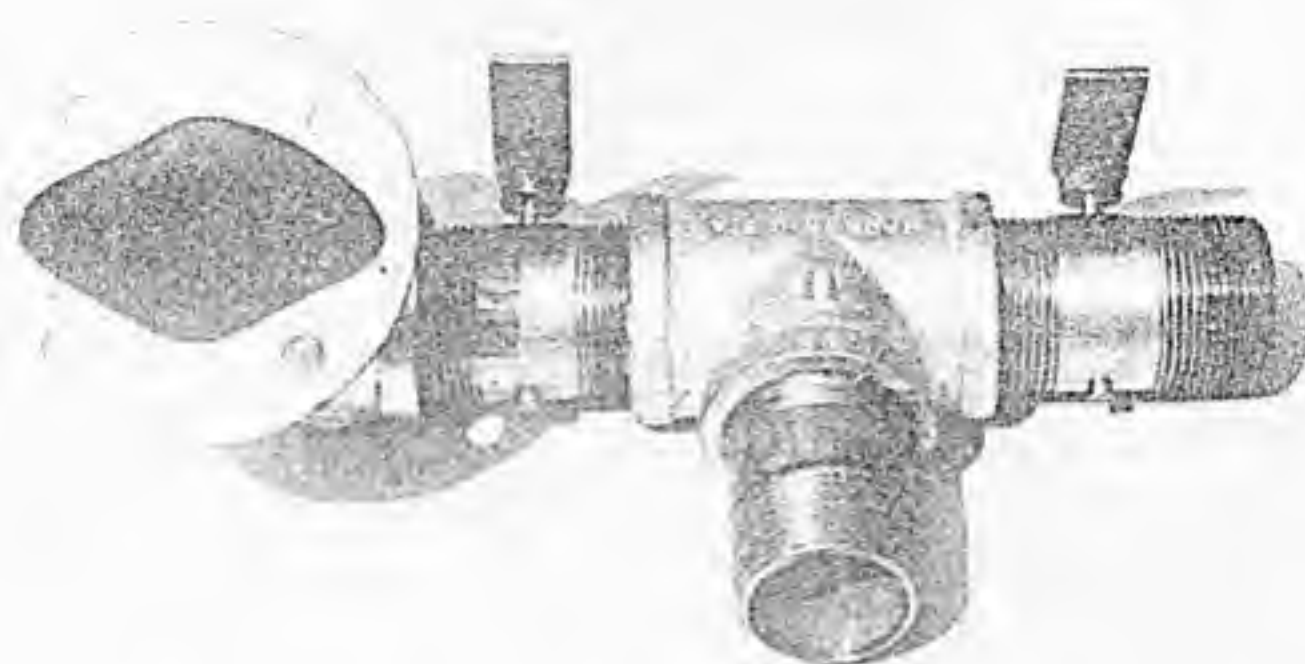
Assembled carburetion unit. Note the gasket on the closet flange.
